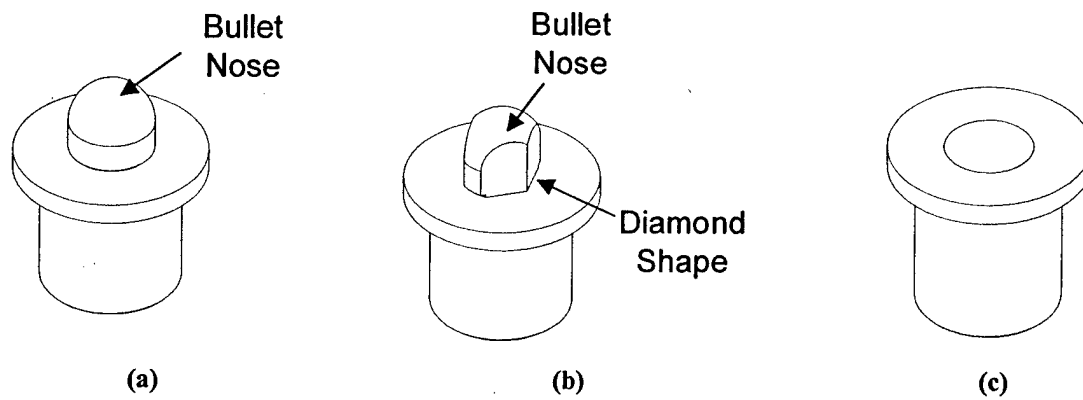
Commercially Available Positioning Pins and Bushings (a) Round Pin with Bullet Nose, (b) Diamond Pin with Bullet Nose, and (c) Bushing
